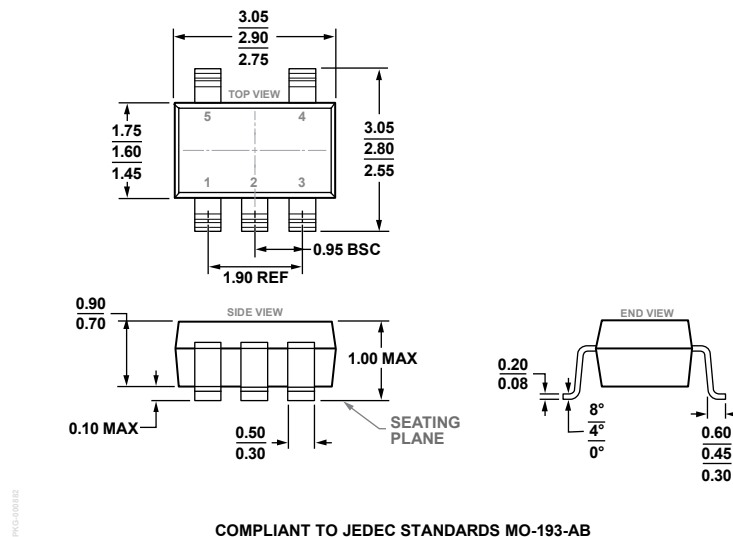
5-Lead Thin Small Outline Transistor Package [TSOT] (UJ-5) Dimensions shown in millimeters
